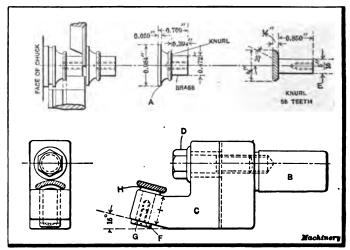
End-knurling Tool held in Turret and Operated at an Angle
